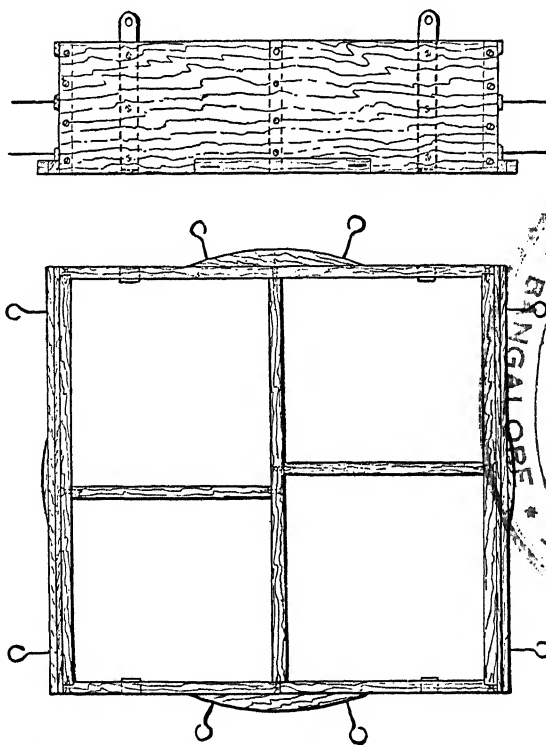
Skeleton Pattern from which all the Outer Mould is taken
